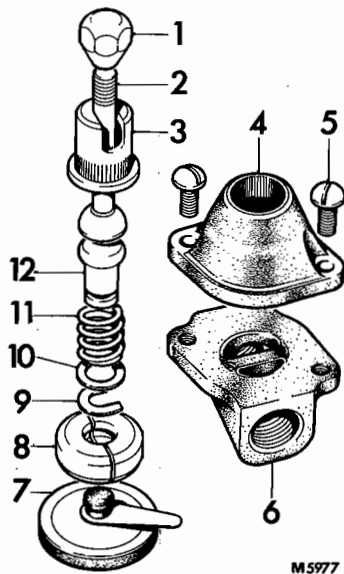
EXPLODED VIEW OF QUICK ACTING VALVE
